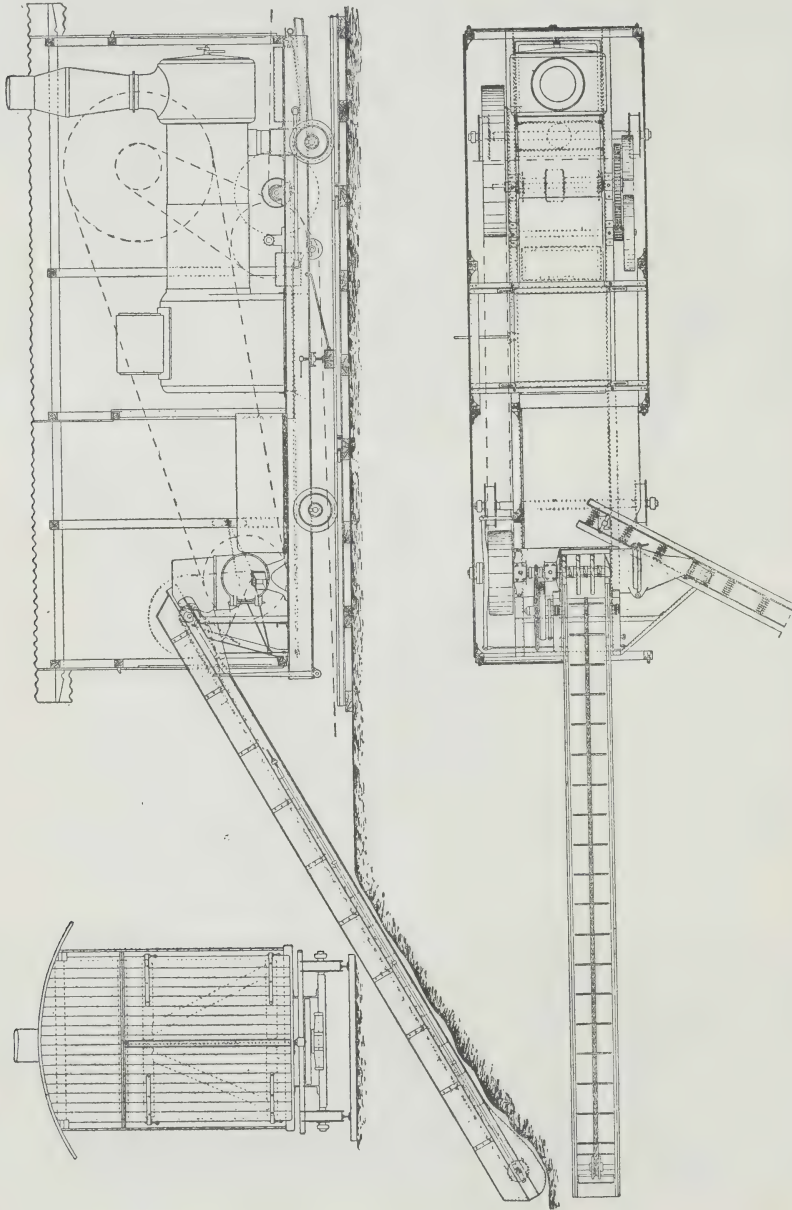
Elevator and rolling table used with Anrep peat machine
